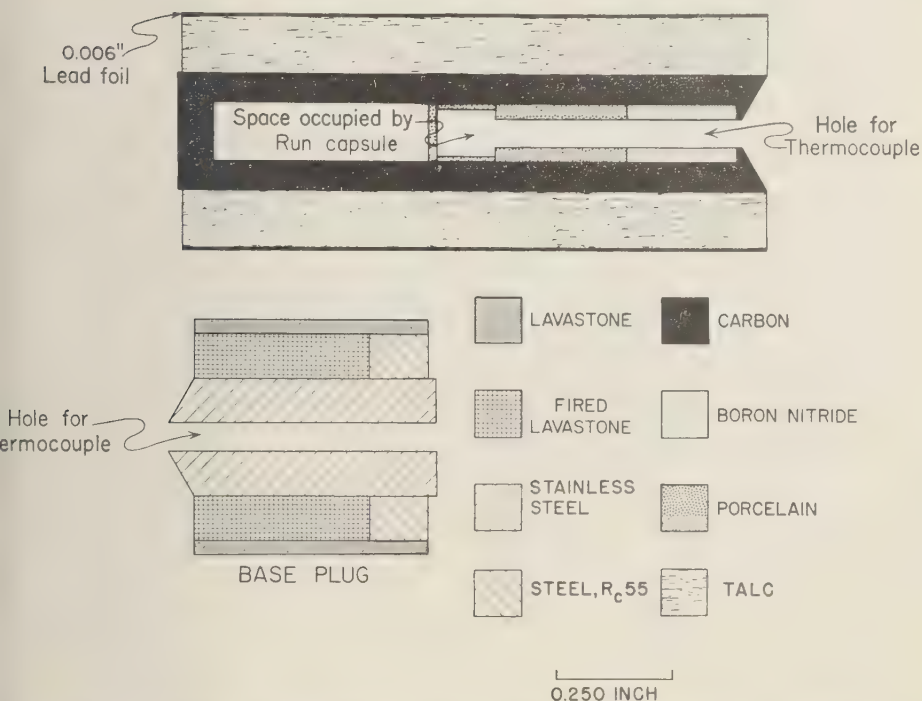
Detail of furnace and base plug assembly used in apparatus shown in Figure 1. The assembly is not recoverable, and a new unit is used for each run.
